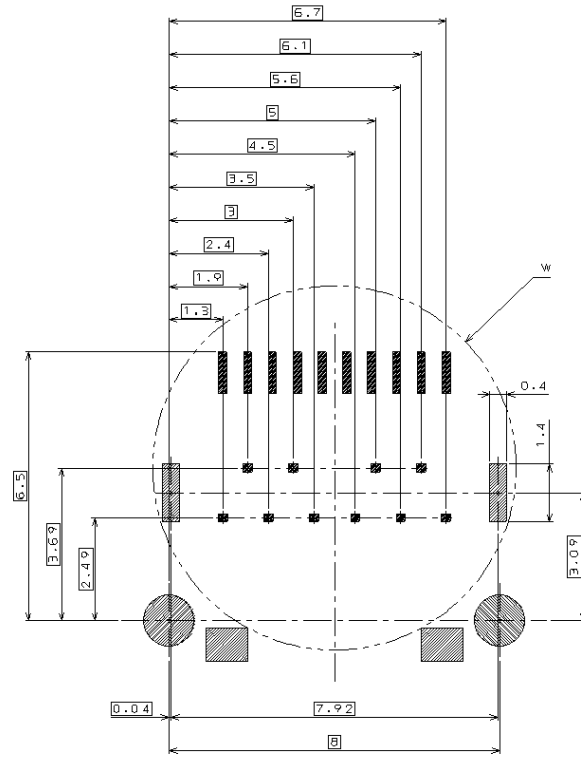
Recommended mDP Connector PCB Contacts and Mounting
